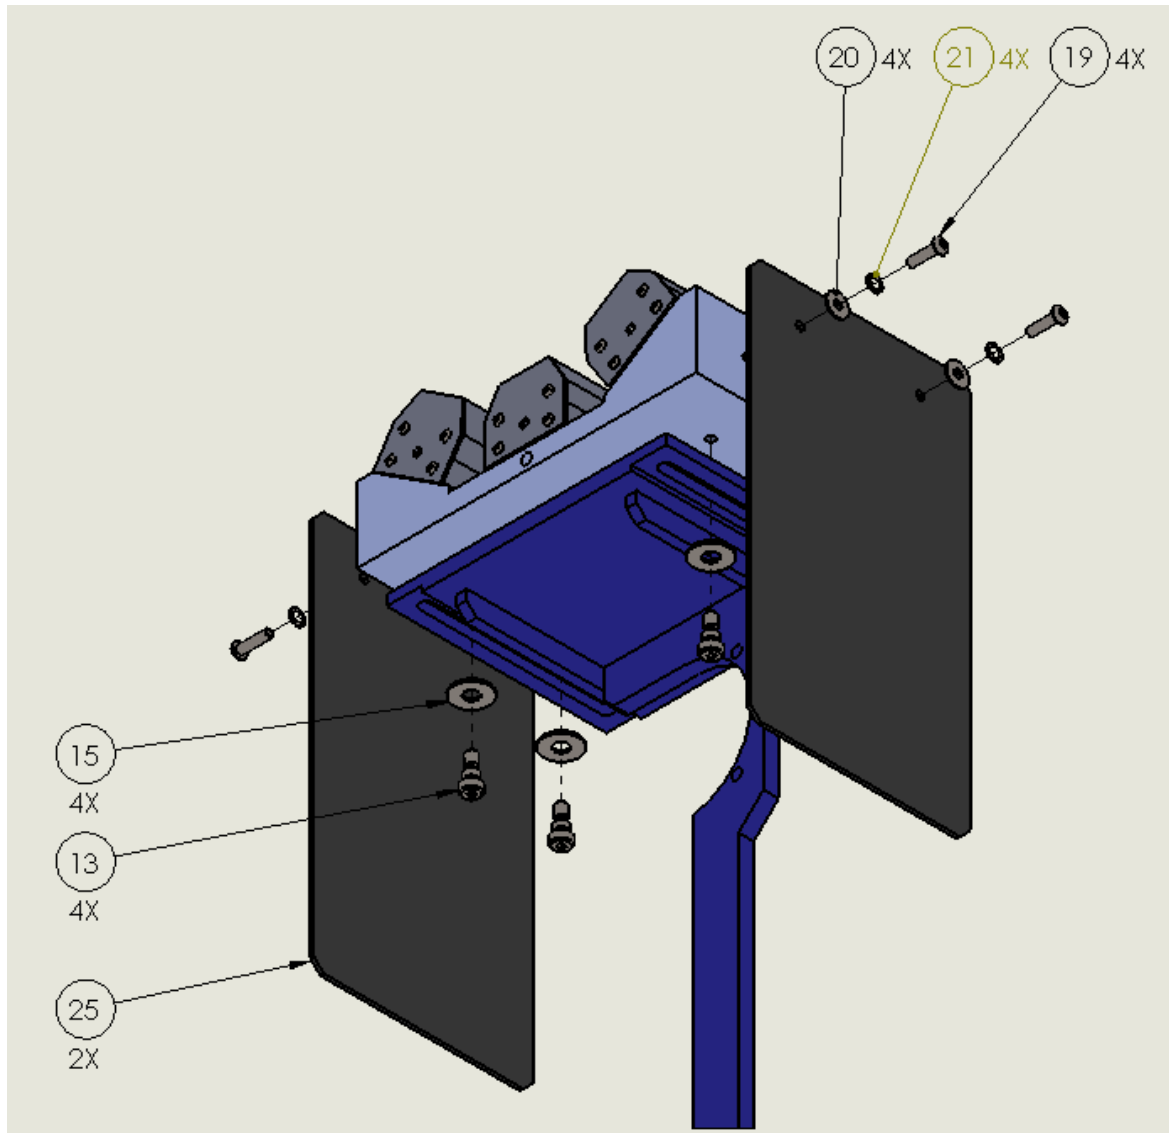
Assembly of 202007 block onto lower bracket with heat sinks
